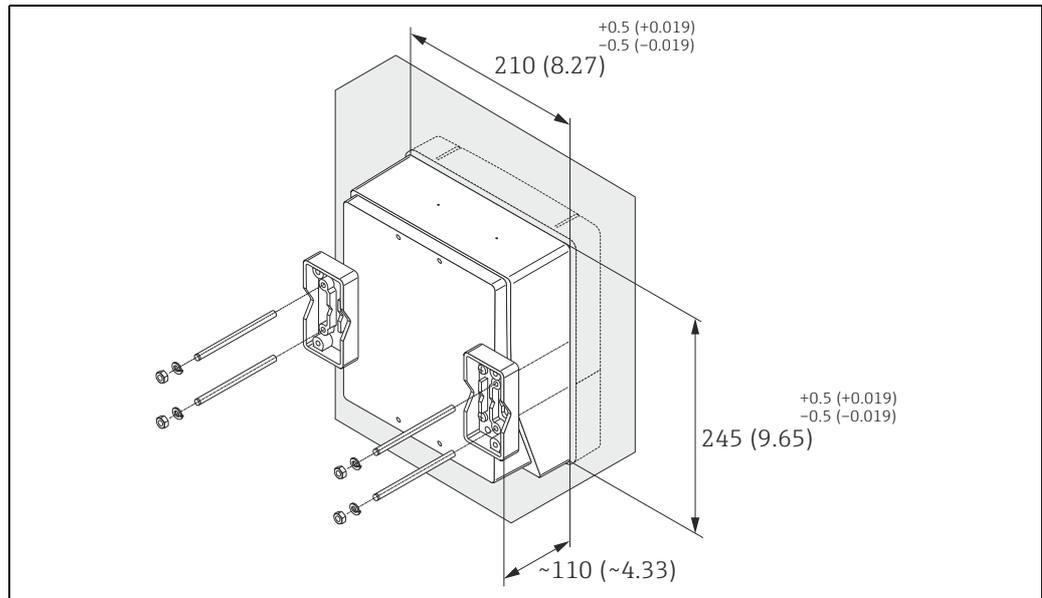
Panel mounting (wall-mount housing). Engineering unit mm (in)
